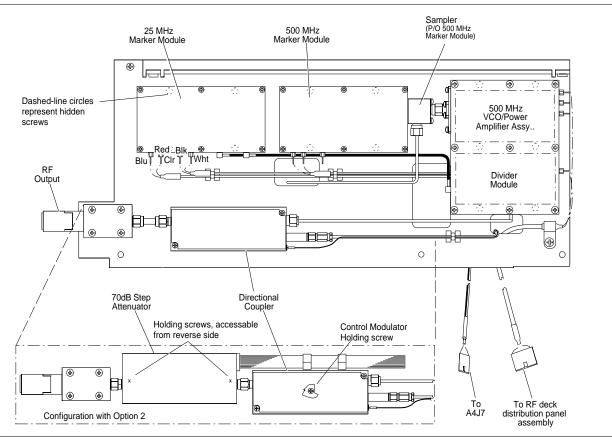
Models 54128A, 54130A, 54131A, and 54136A RF Deck Parts Location (External Side Detail)
